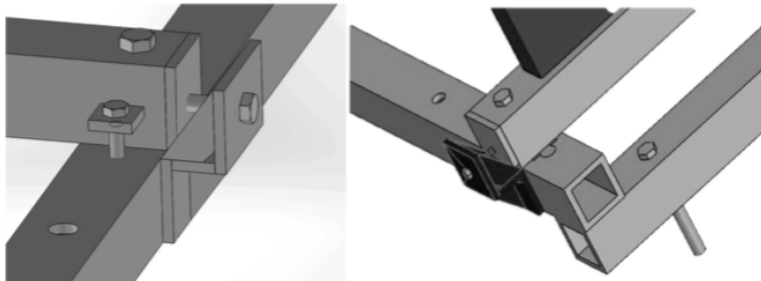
Alignment system: set screw brackets for horizontal adjustment and shims for vertical adjustment
